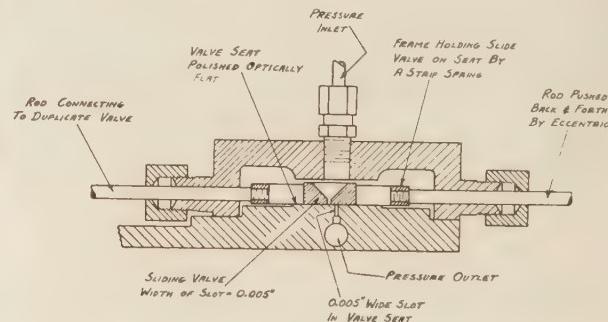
CONSTRUCTION OF SLIDE VALVE
